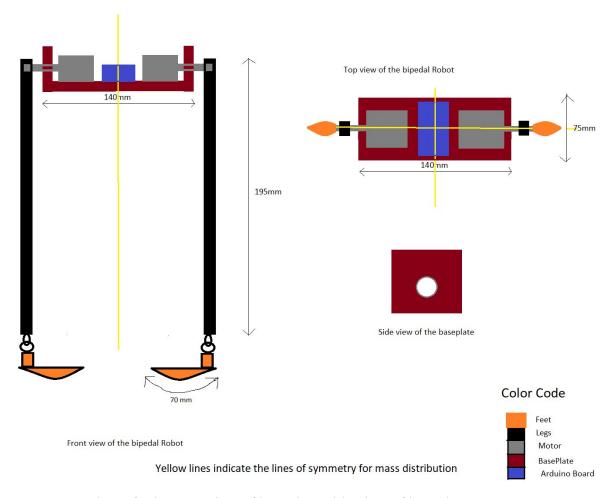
Front view of robot, top view of baseplate, side view of baseplate
